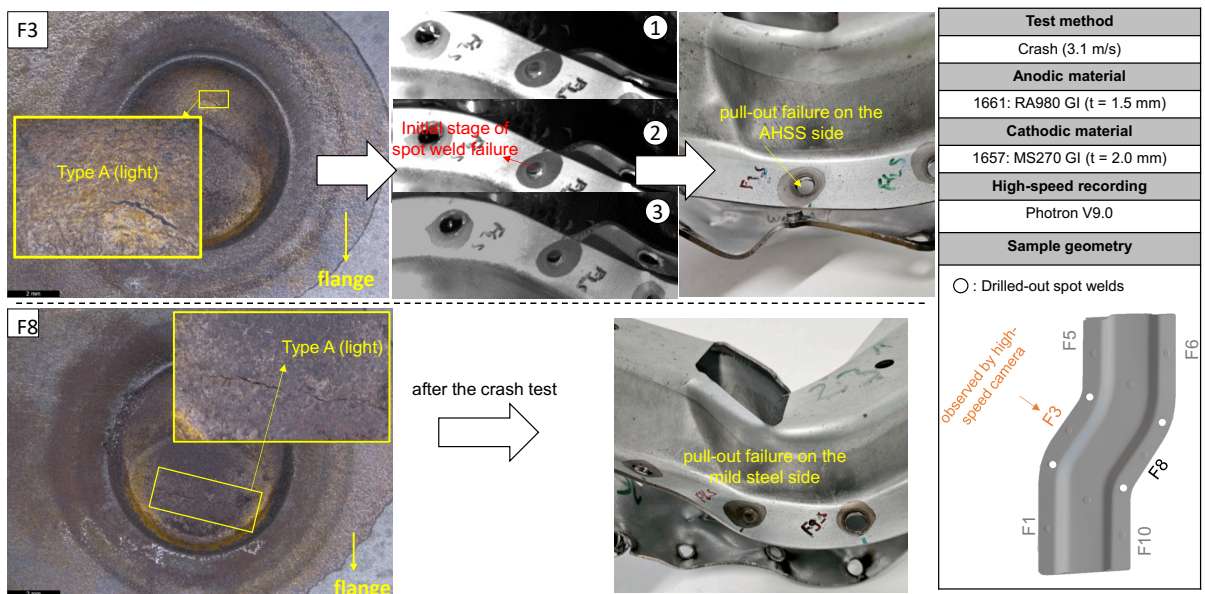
Spot weld failure in sample 29 (MTC1)
